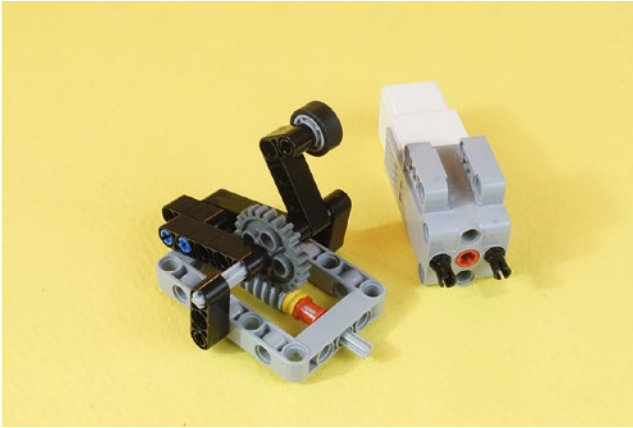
Put two short connectors into the front medium motor holes as shown. The side fasteners will be wobbly at this stage. Flipping the Gear Yoke over gets you to the next picture.
